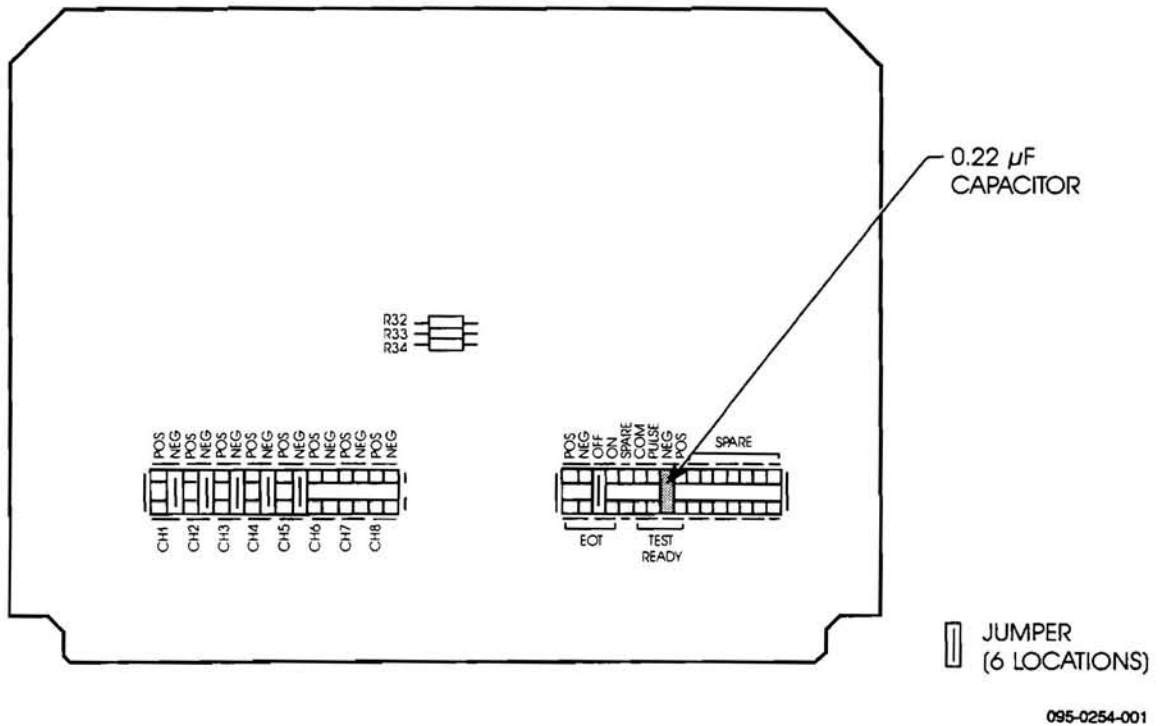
3608 Opto-Interface Board After Necessary Modifications
